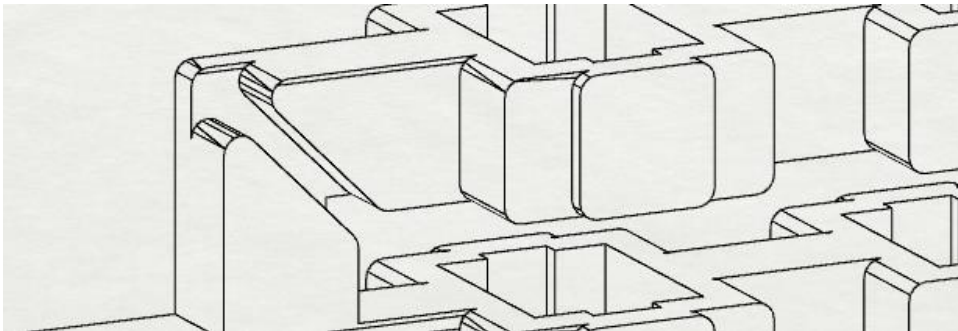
Sharp corner at sudden cross-section change in new testing mold design
